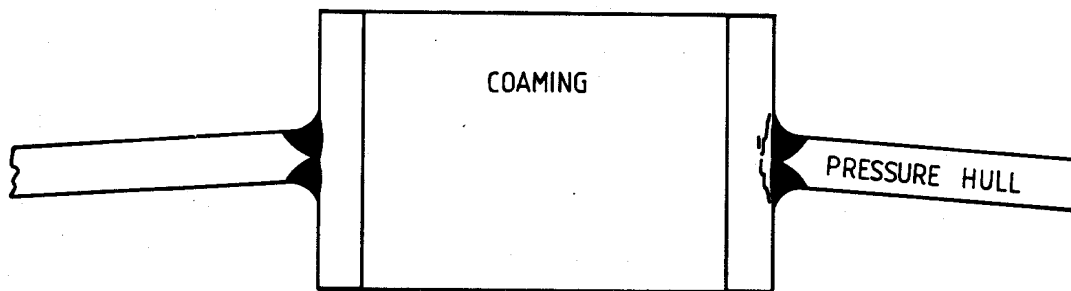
COAMING IN P.H. T BUTT WELD
